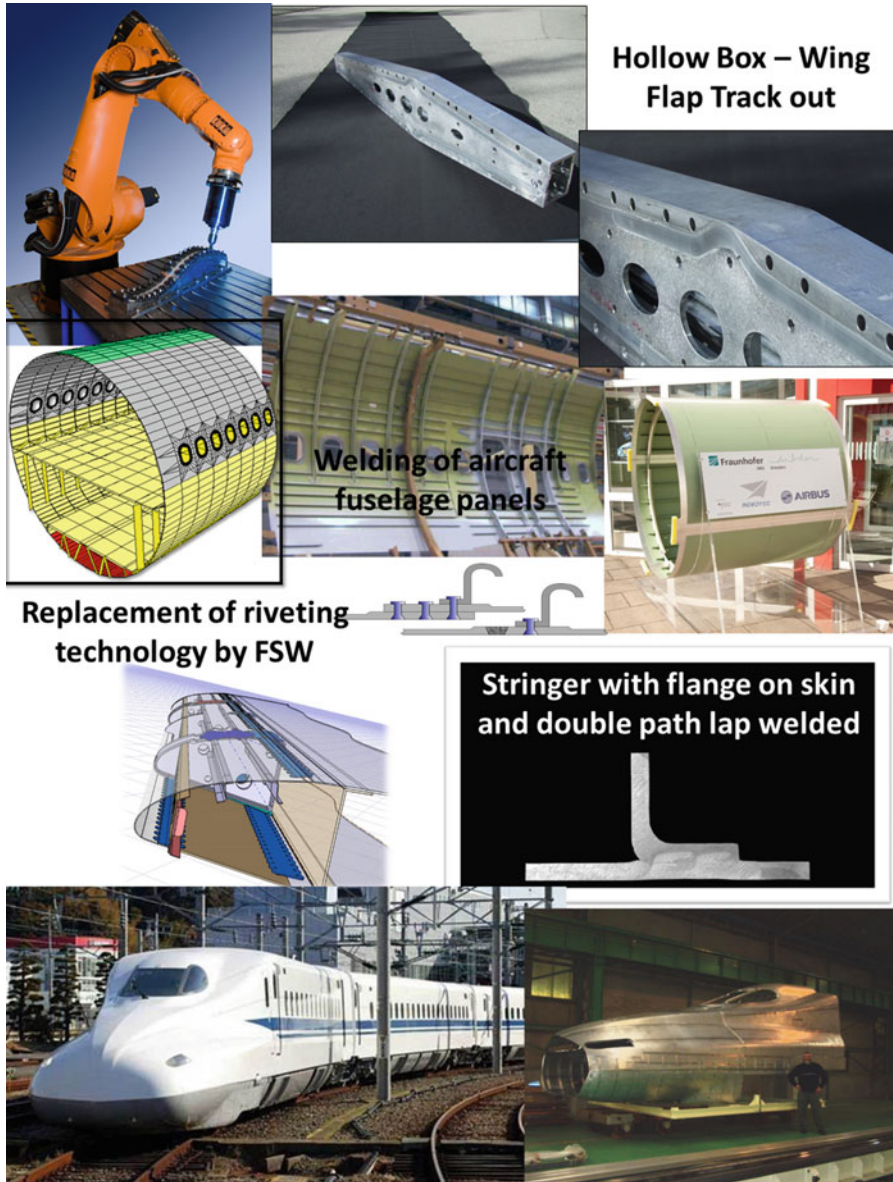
A few illustrative examples of implementation of friction stir welding (all aircraft related photographs courtesy Airbus Group, Ottobrunn, Germany and Shinkansen photographs courtesy Mr. Gilbert Sylva)
